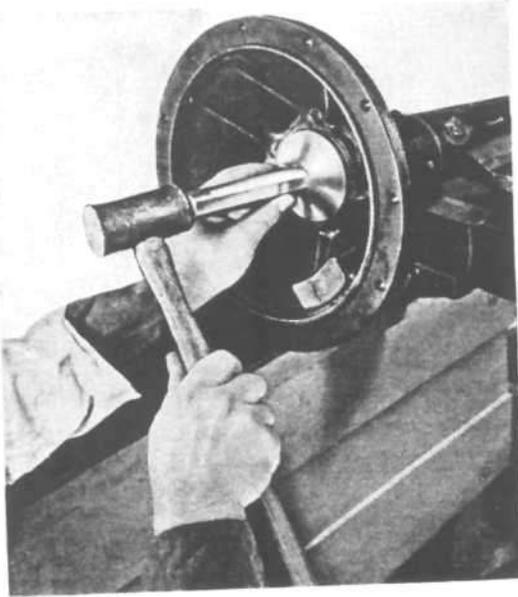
DIFFERENTIAL BEARING CUP DRIVER
